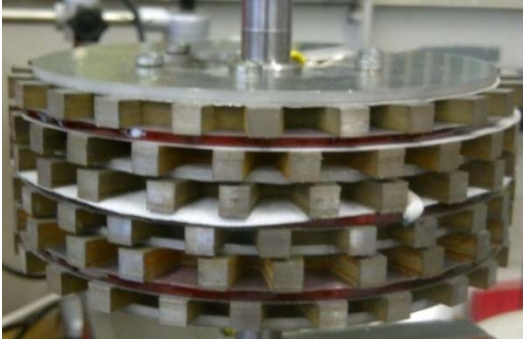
Axial view of the pitched machine the teeth can be seen to be closer at some points and further away at others.
